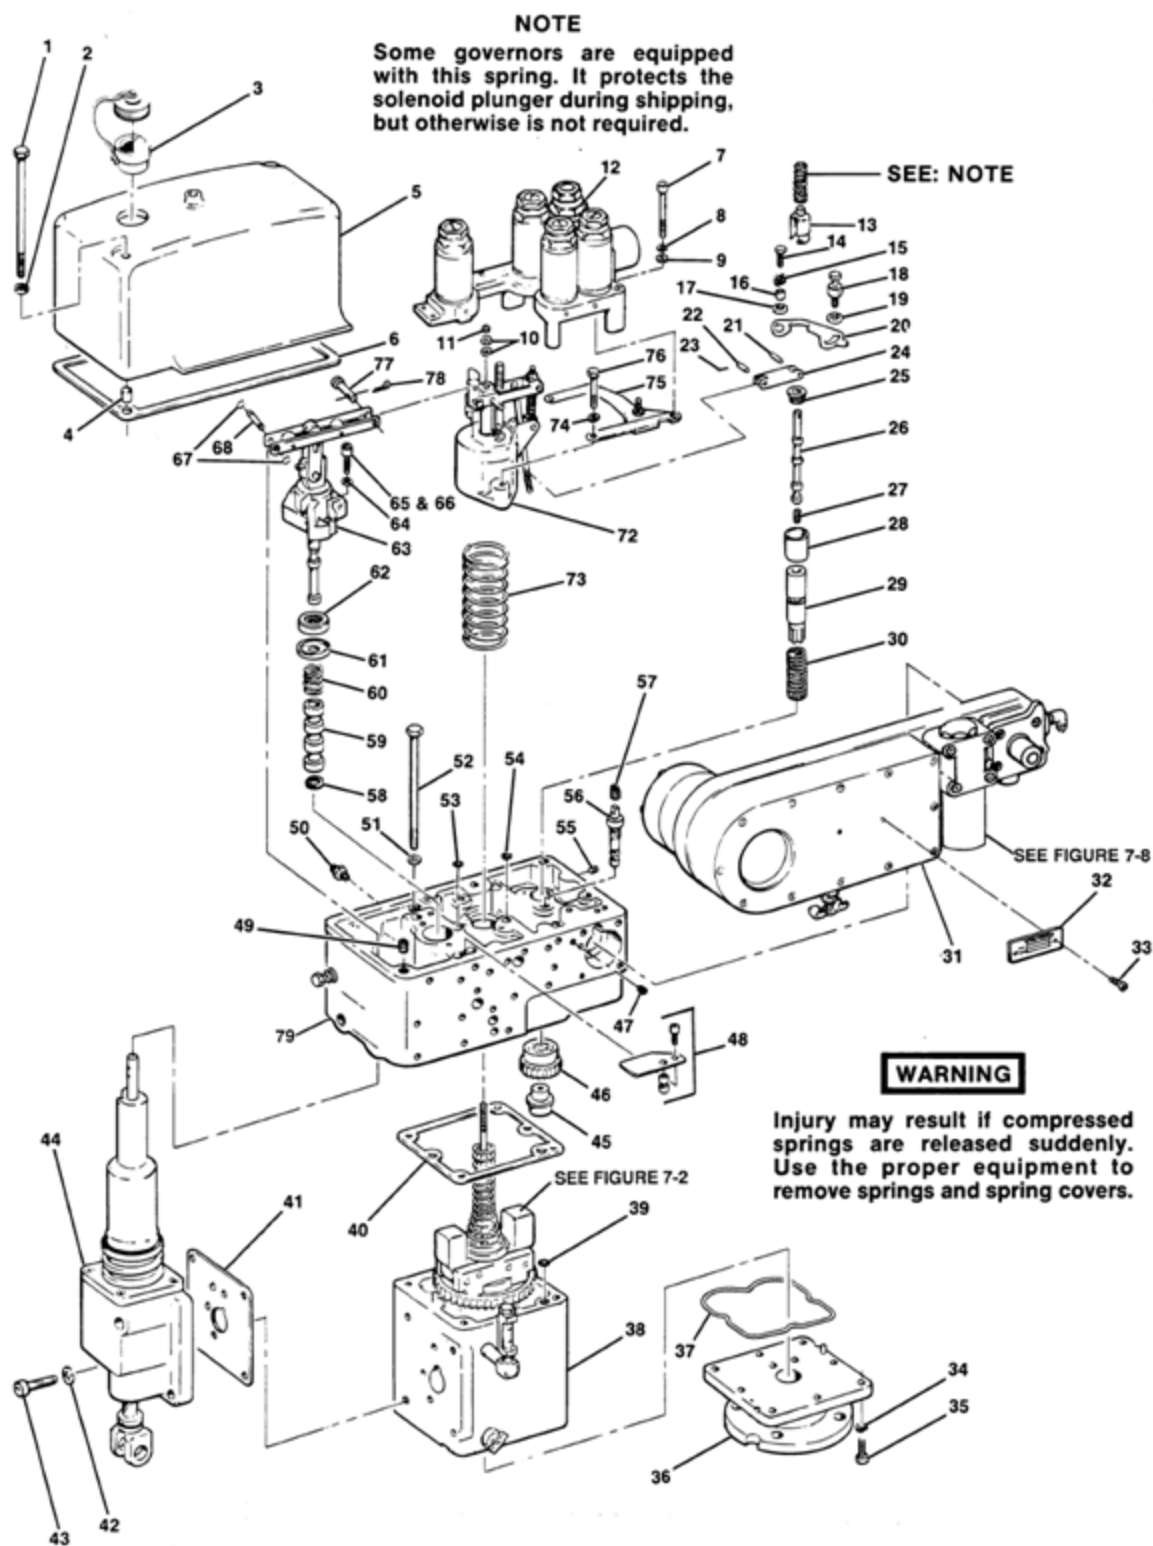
Illustrated Parts of PGEV Section Assemblies
